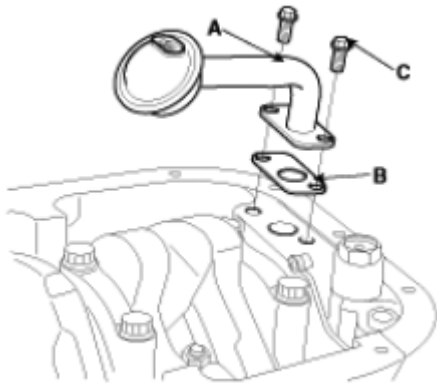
Identifying Oil Screen, Gasket And Bolts
